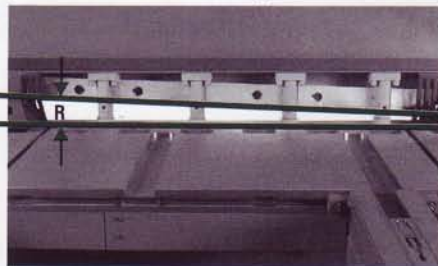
Typical rake angle on a hydraulic shear. (Fixed guard removed for illustration purposes only.)
